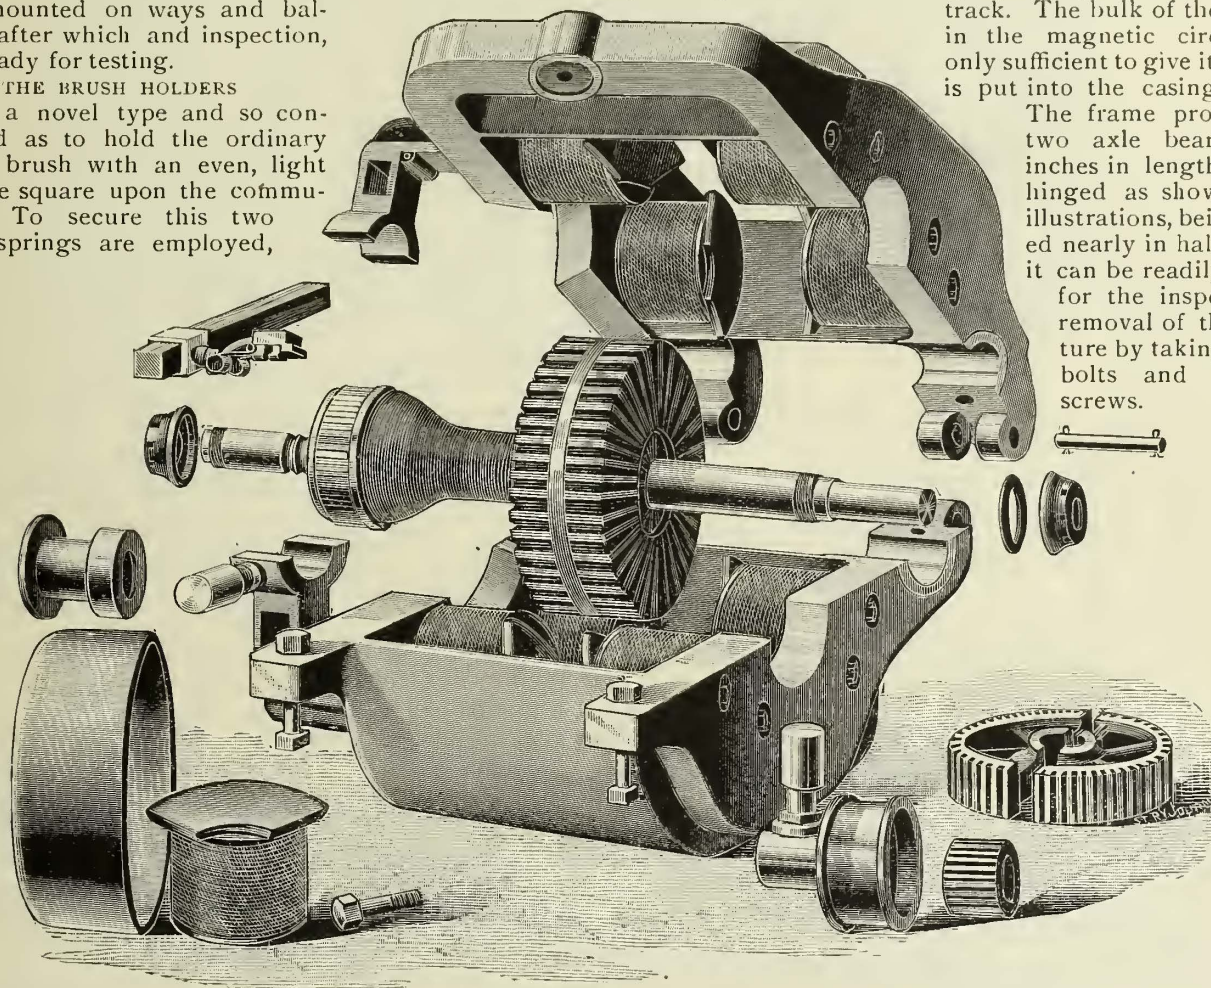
PARTS OF THE SHORT SINGLE REDUCTION MOTOR—IMPROVED TYPE.
